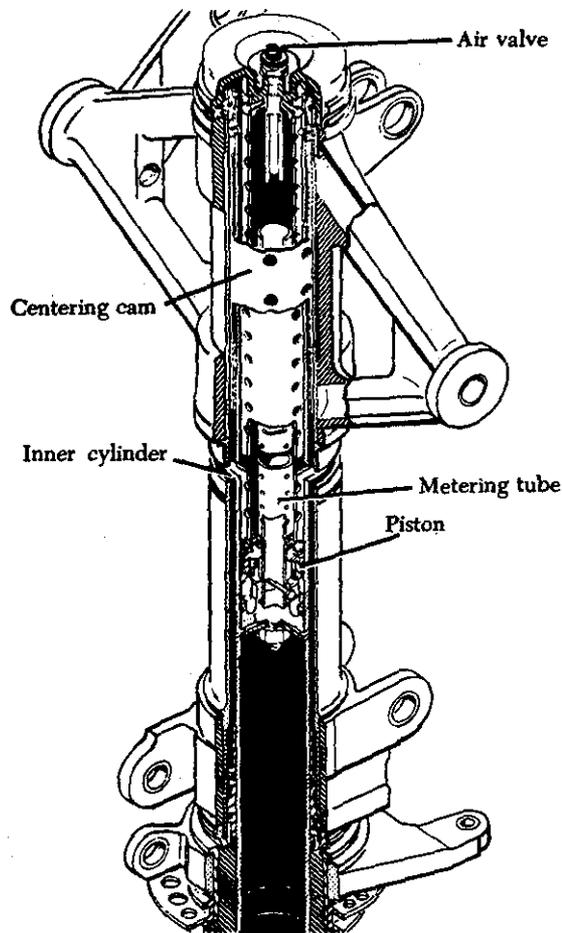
Landing gear shock strut of the metering tube type.
